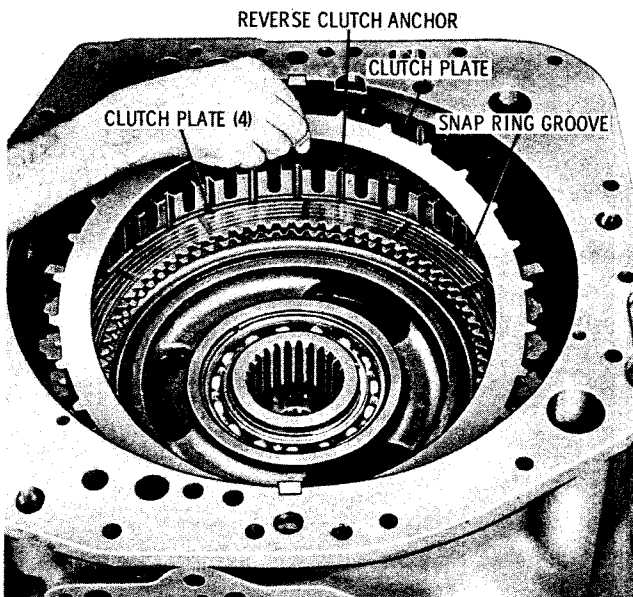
Installing reverse clutch external-splined plate (5631 models)
